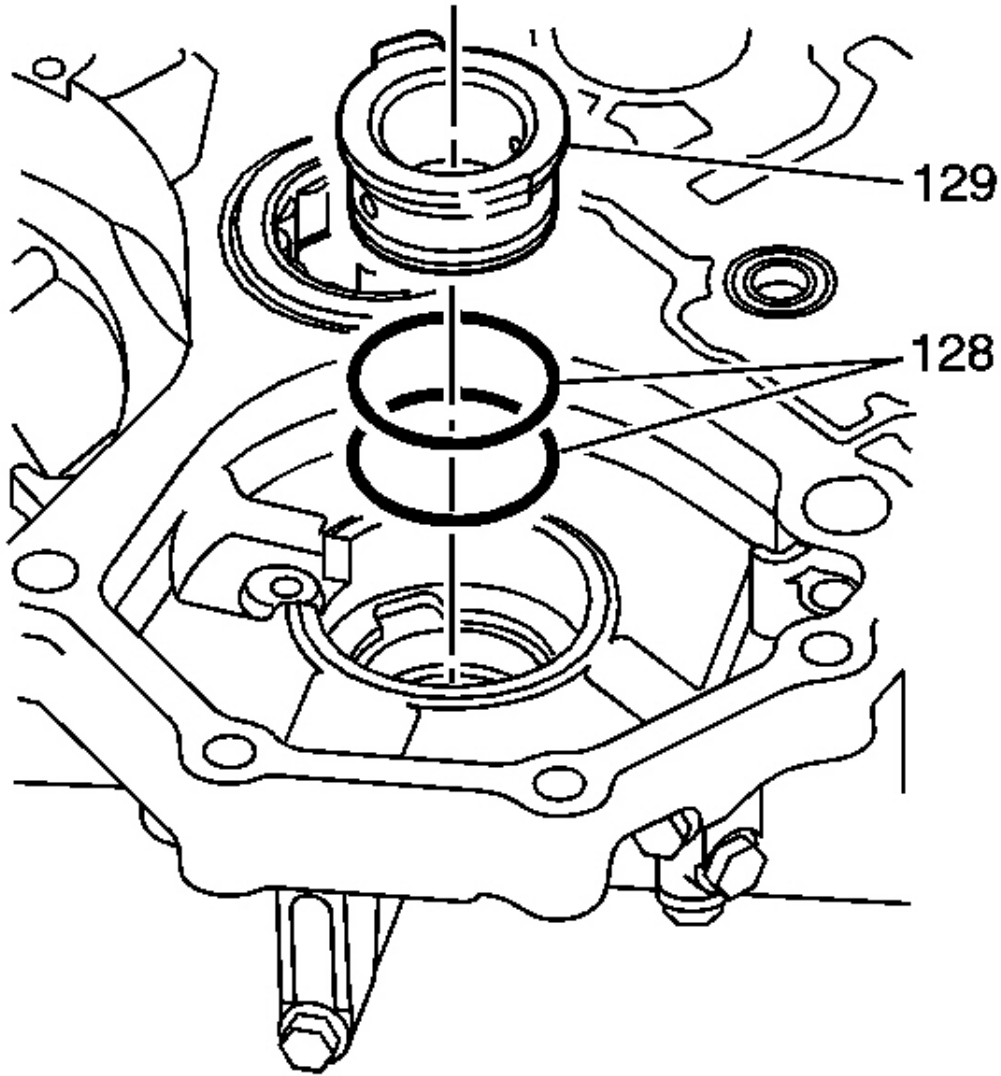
1st/2nd Clutch Shaft Lube Feed Collar & O-Ring Seals
